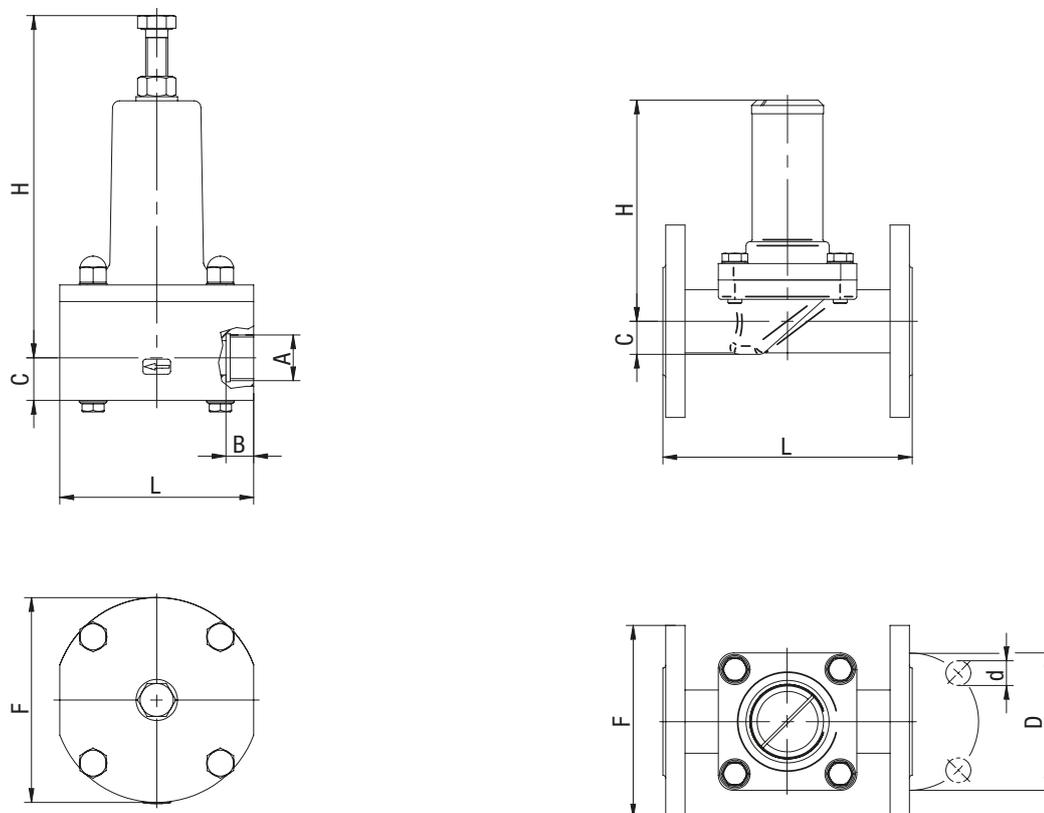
Dimensioned drawing Back-pressure and pressure relief valves DN25 - DN65 (spring-loaded diaphragm valve)
